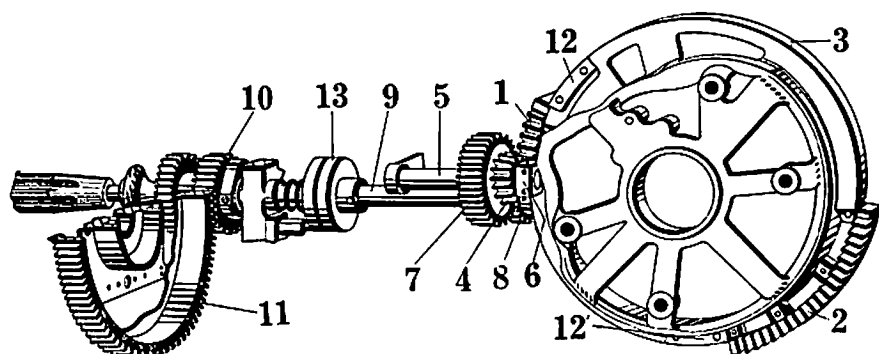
Side View of the Vise Closing and Mold Turning Cam and the Mold Driving Mechanism in Assembly
